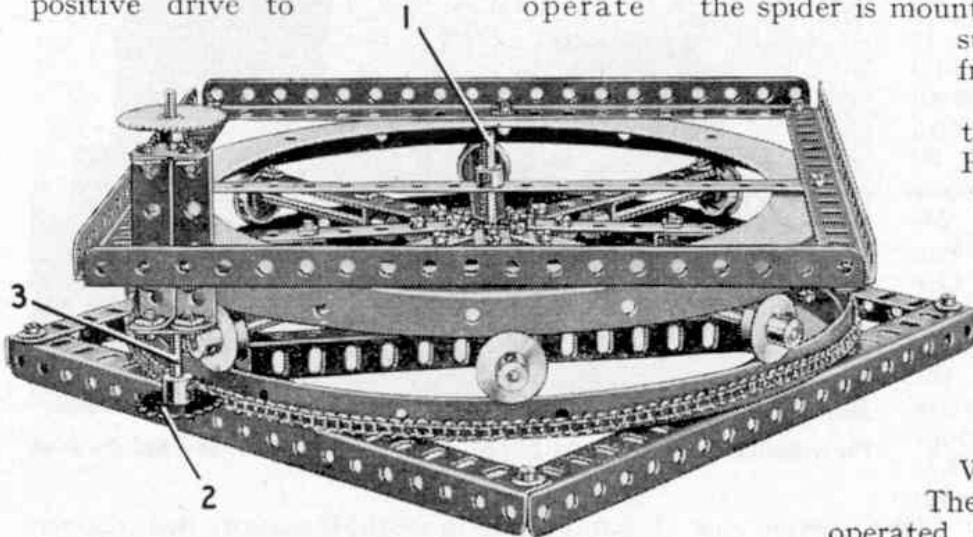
A built up roller bearing unit in which provision is made for operating the slewing movement of a model crane. It was designed by Mr. C. Cohen, Cape Town, South Africa.
